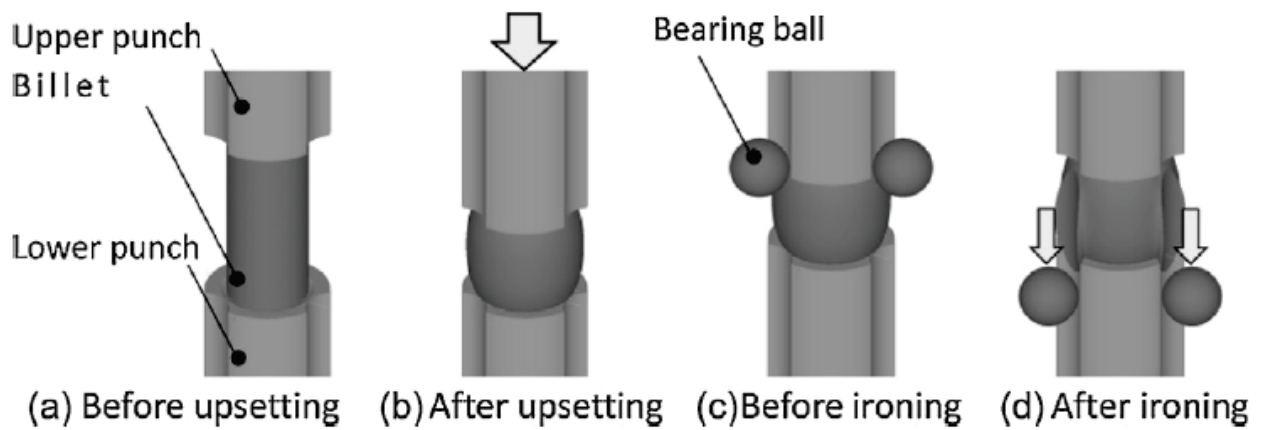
Schematic illustration of multi-stage forging test [12]
